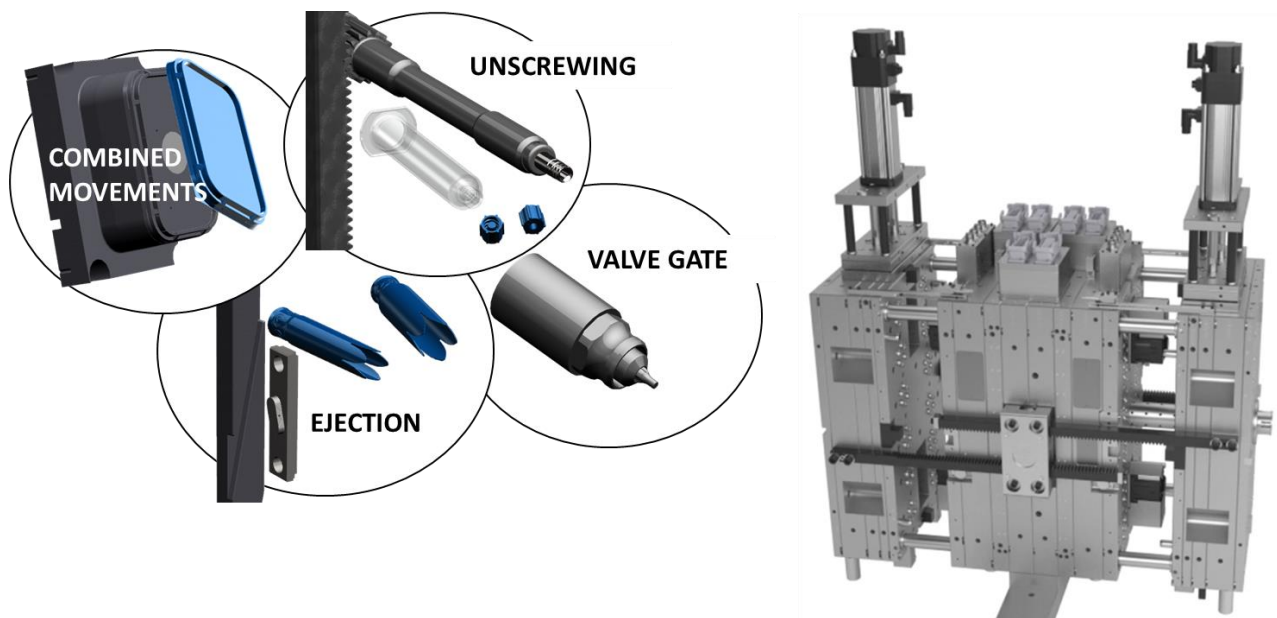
Solutions for electrical mold movements / 72+72 cavity stack tool for locking cone
